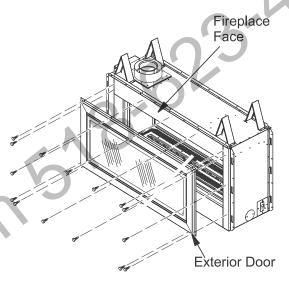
Installing Exterior Door for See-Thru In/Out Application
